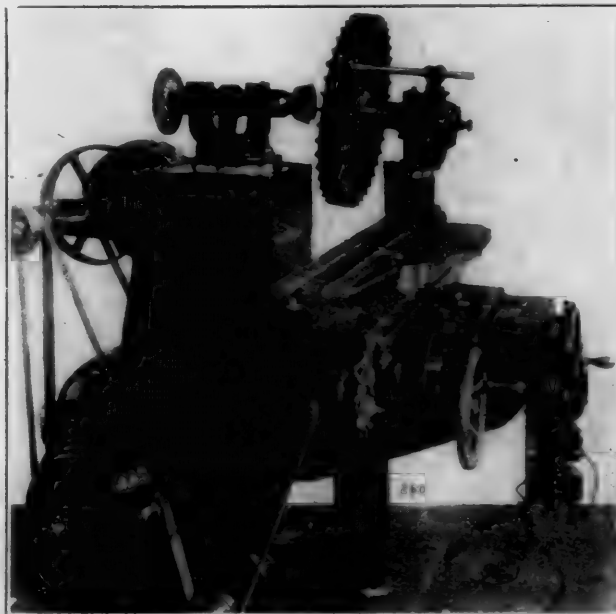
SHARPENING THE SIDE TEETH OF A LARGE INSERTED TOOTH FACE MILL.
